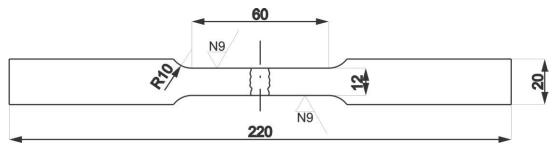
Geometry of the specimen for the tensile test of the P460NL1 steel
